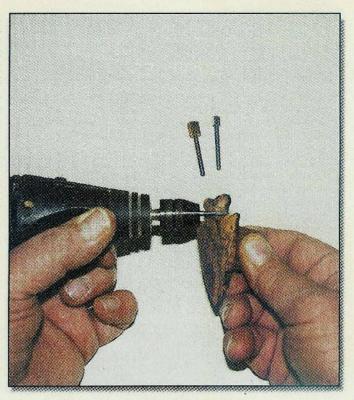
Carve the piece with a rotary grinding tool and various size bits.
